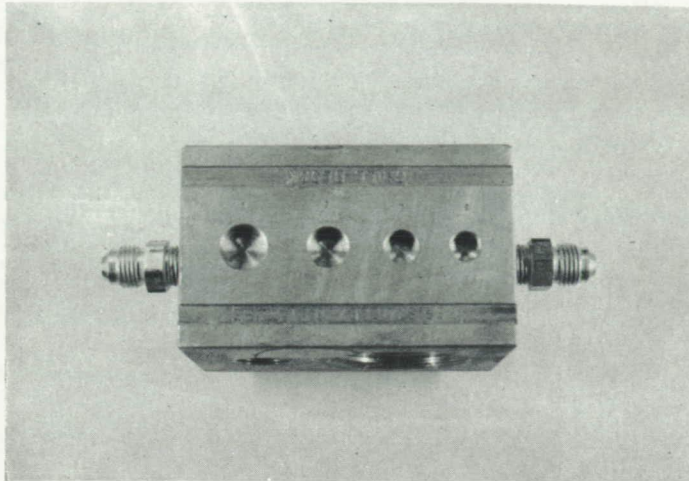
Chill Block Assembly for Brazing Face Seal Connectors to Tubes
